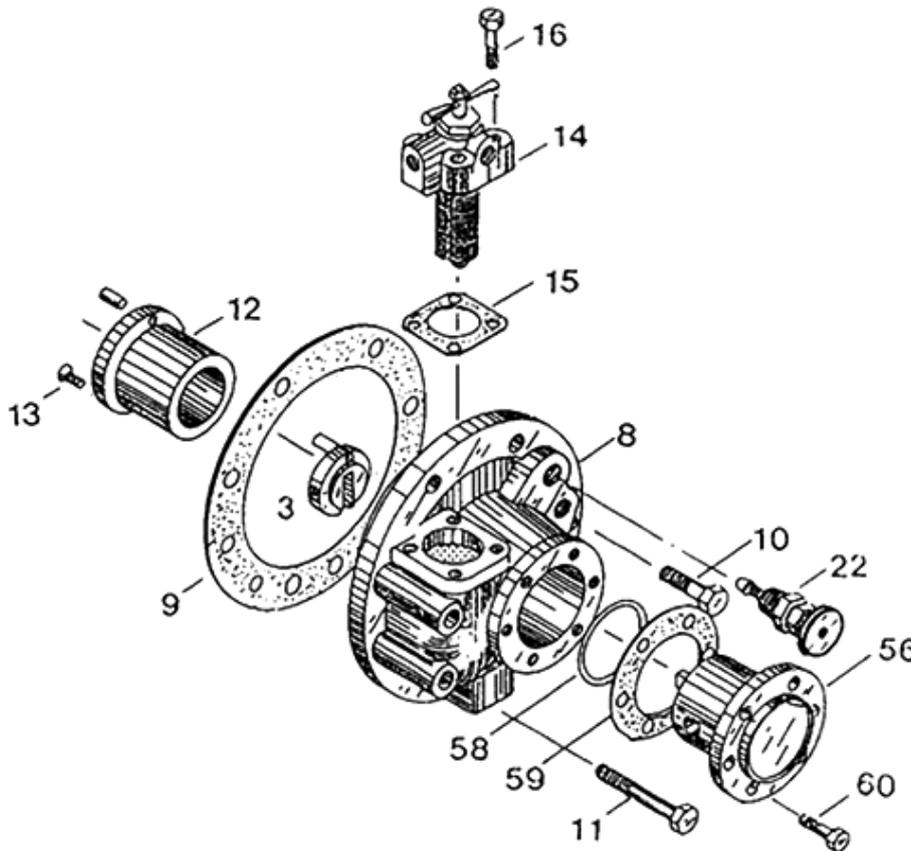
WA-type Main Bearing Head and Associated Parts
